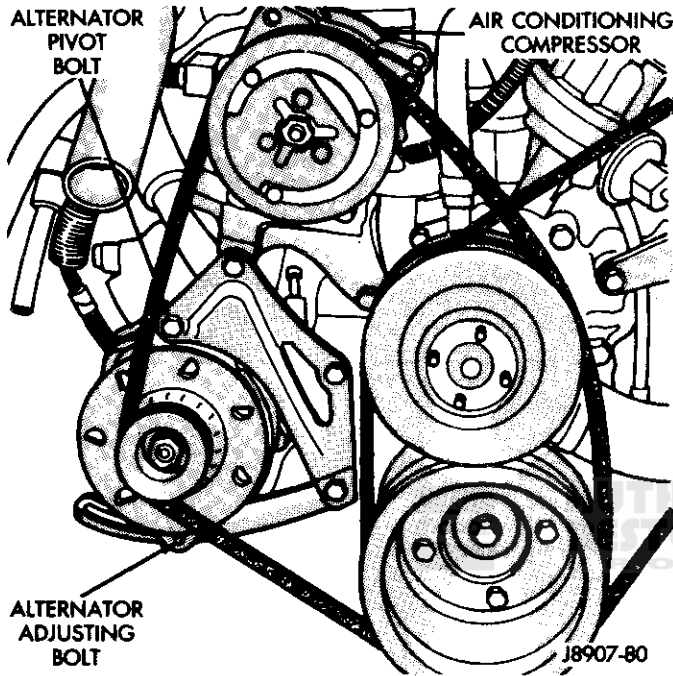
Alternator Drive Belts Adjustment—5.9L
